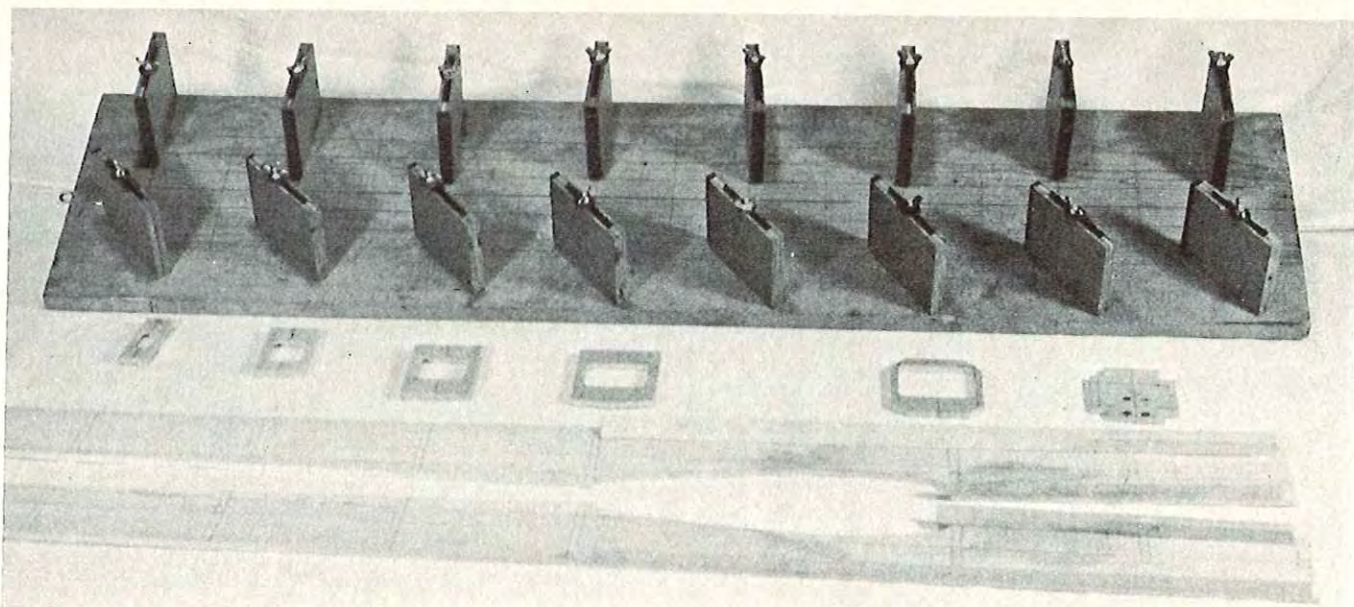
View of fuselage sides, formers, and RCM Building Jig.
